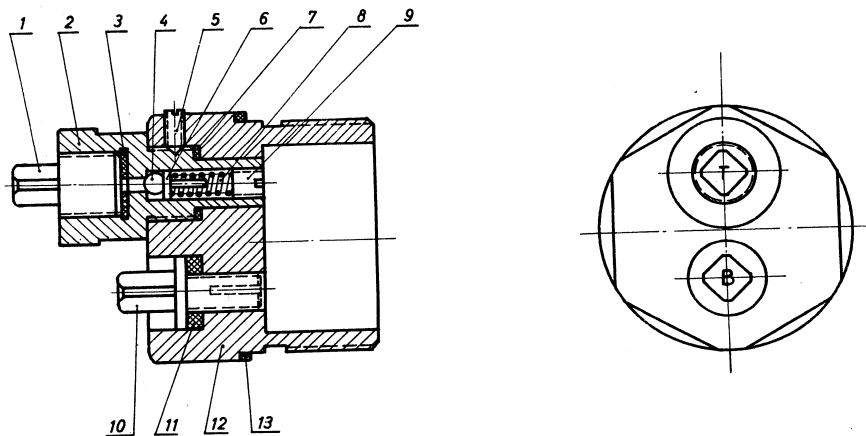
FLUID ADDING VALVE BOX — RECOIL BRAKE
